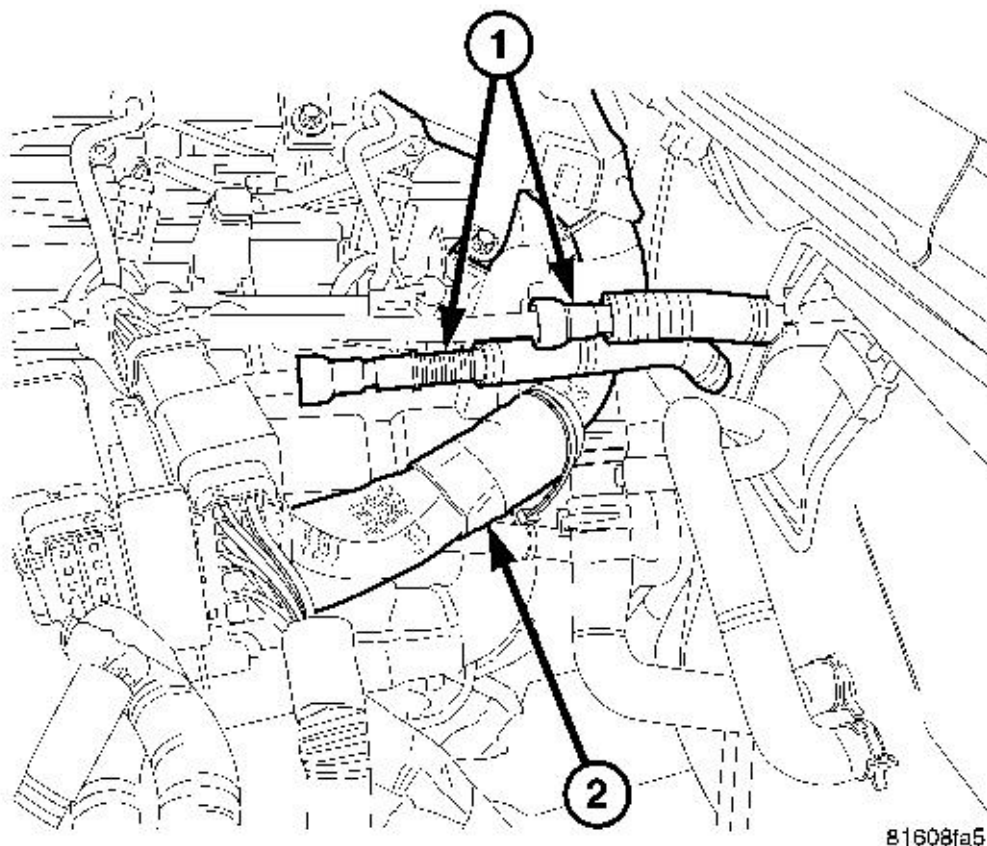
Fuel Tank Supply & Rear Engine Wiring Harness
